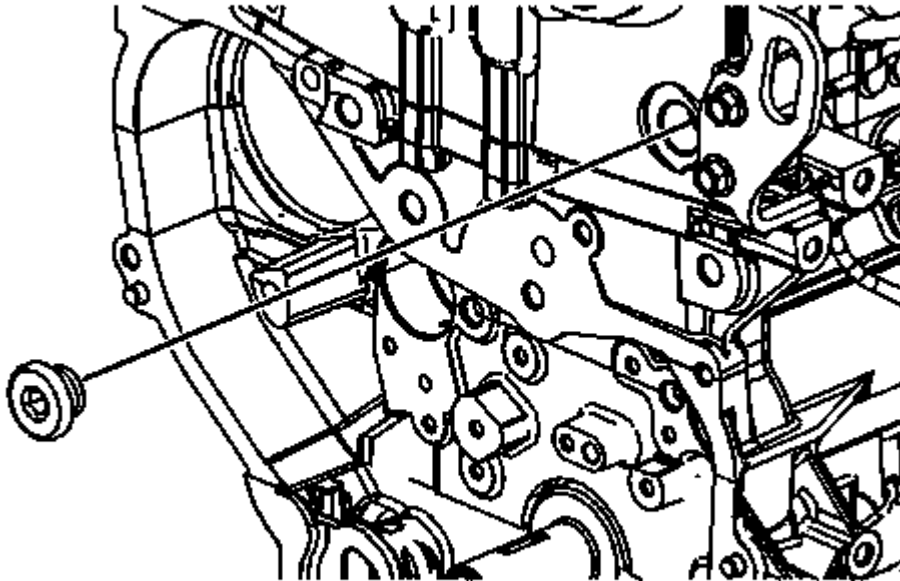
View Of Timing Chain Guide Bolt Access Hole & Plug
